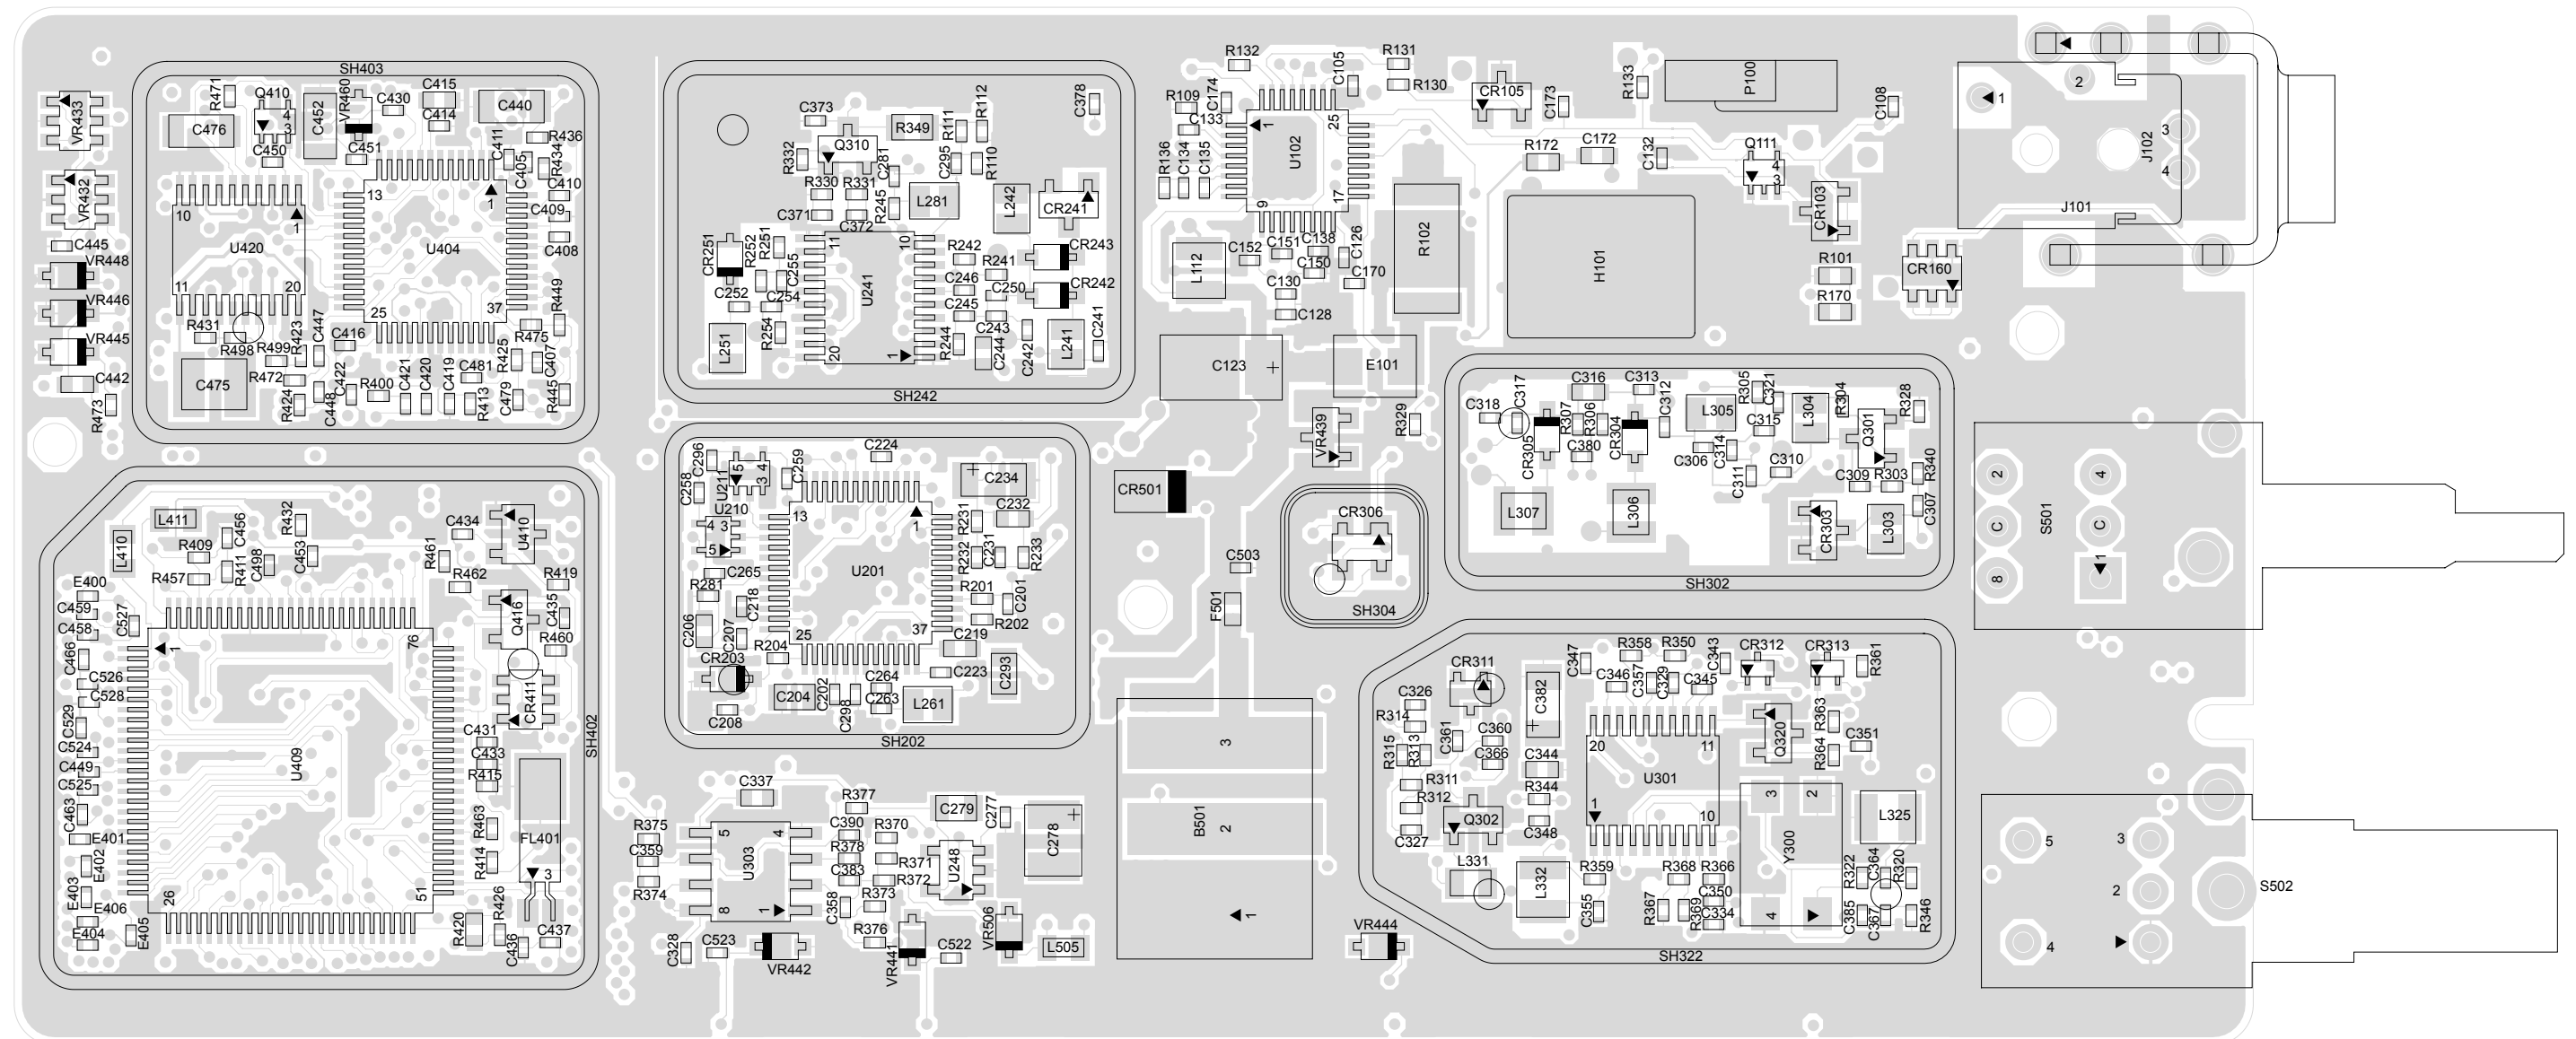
UHF (403–470 MHz) Main Board Bottom Side: PCB 8486458Z03 rev. C
